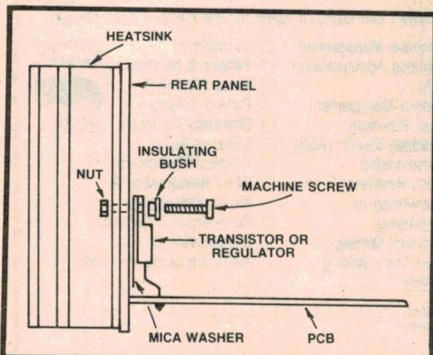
how the heatsink assembly goes together. Use your multimeter to check that the output devices are correctly insulated.
